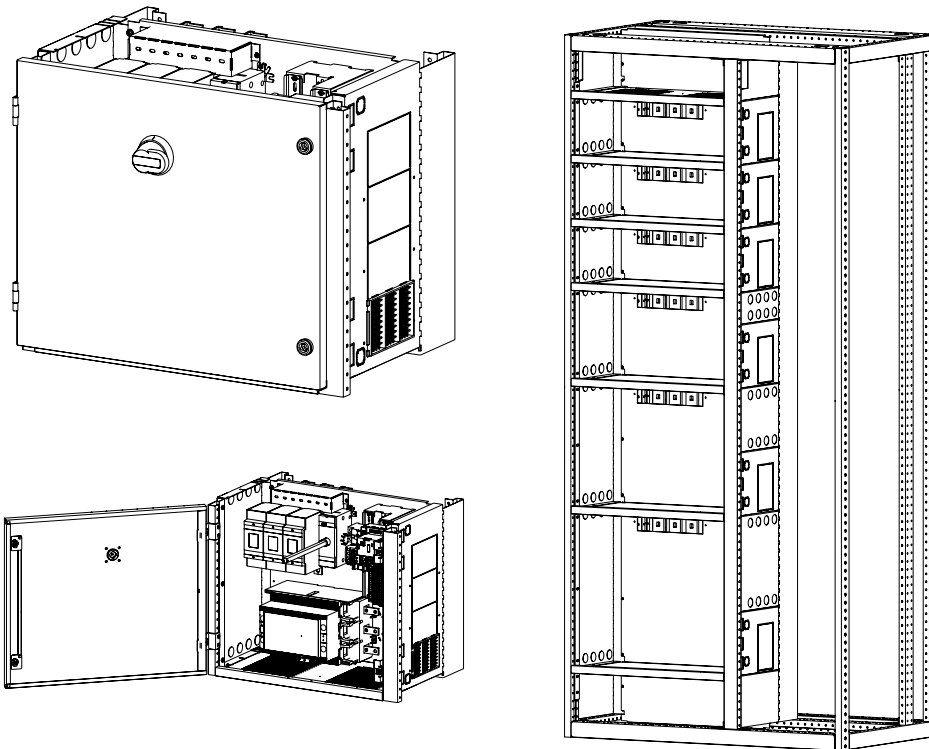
Fixed module example open and close (left), fixed empty section example (right)
